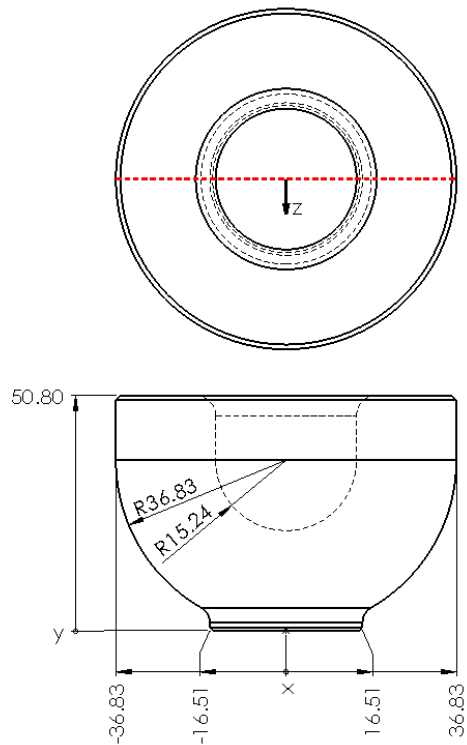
Stainless steel forging dimensions and measurement location (dimensions in mm)
